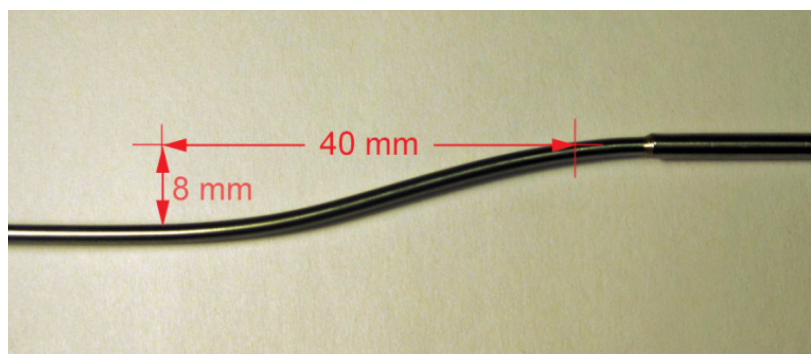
Offset bend in a loose assembly, molybdenum-sheathed thermocouple.
